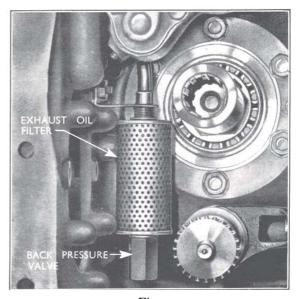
Exhaust Oil Filter and Back Pressure Valve
